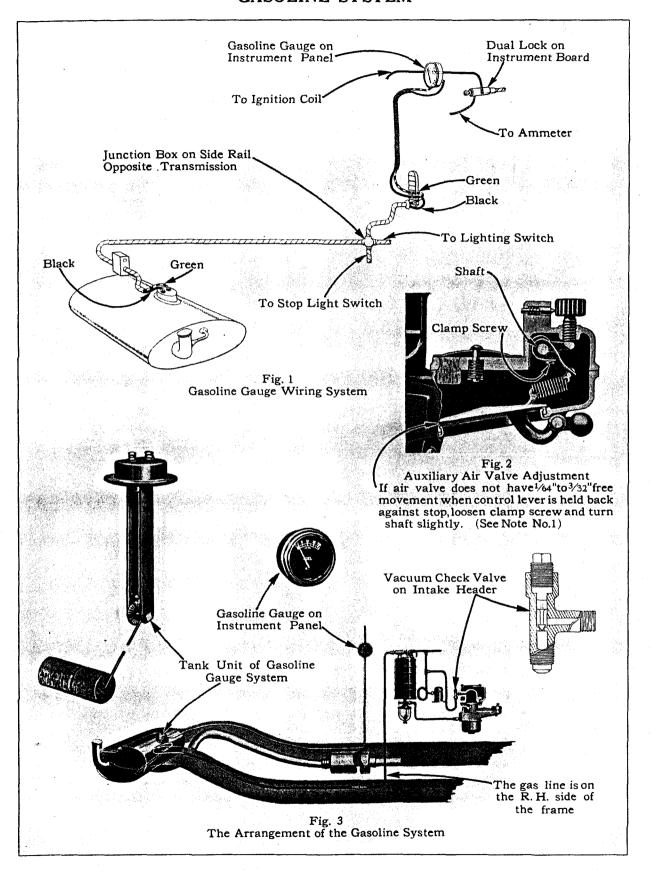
Arrangement of the Fuel System Cadillac 353—La Salle 340
